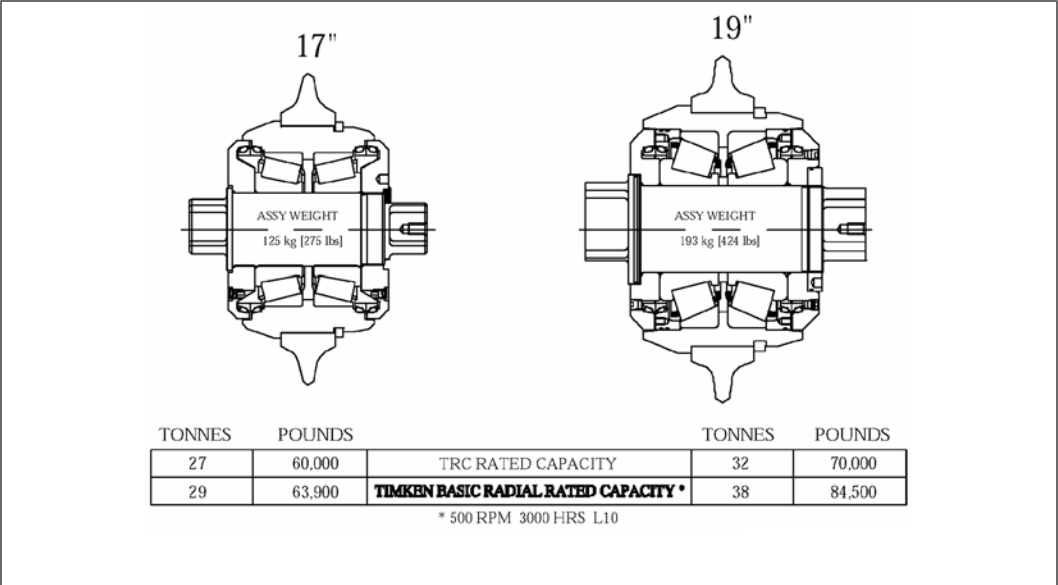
Bearing load rating and assembly weight: 17-inch vs. 19-inch cutter
